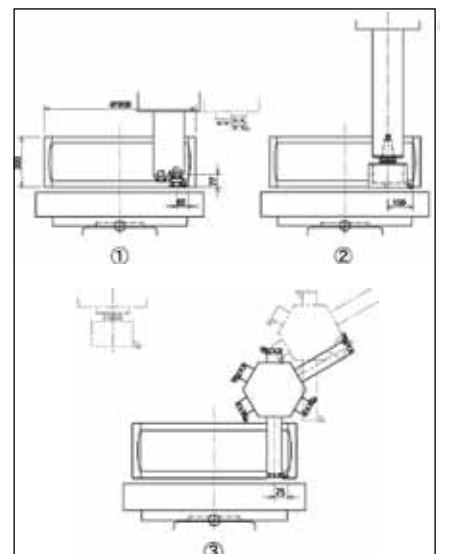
The VTP-1000’s tool holder on the Z-axis tip accommodates two tools.
